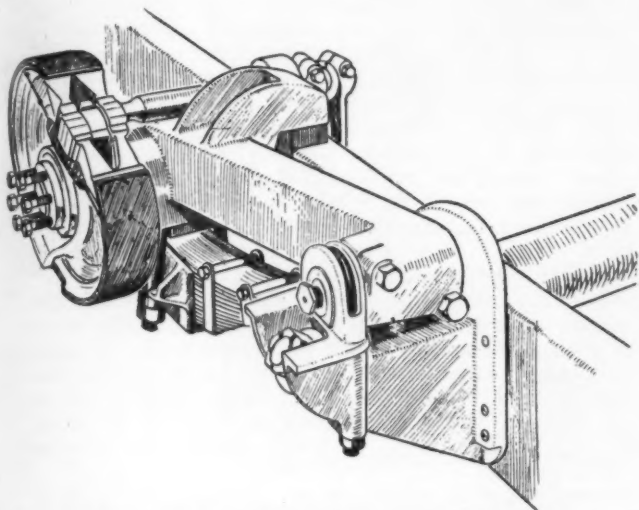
NOVEL METHOD OF MOUNTING REAR WHEELS ON THE UPPERCU COACH
